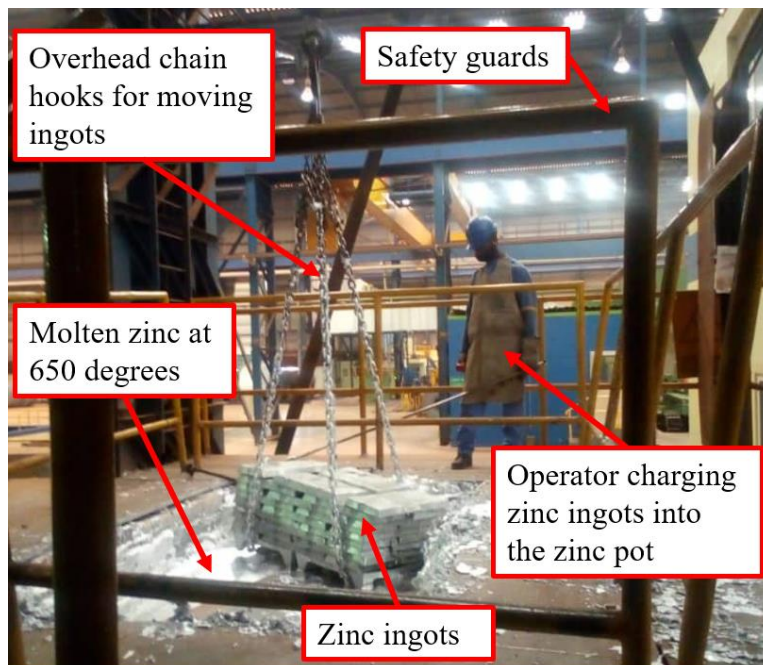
Overview of steel manufacturing tasks MC_2-T_{25}
